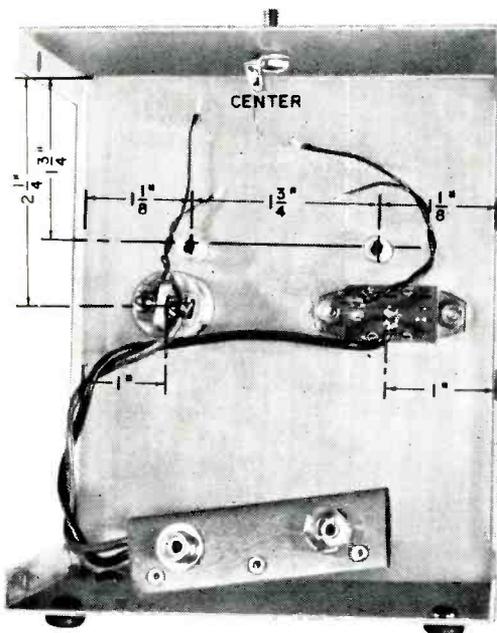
Prepare cabinet and mount parts as shown before installing completed board. Note terminal located between screw and washer on antenna post.
